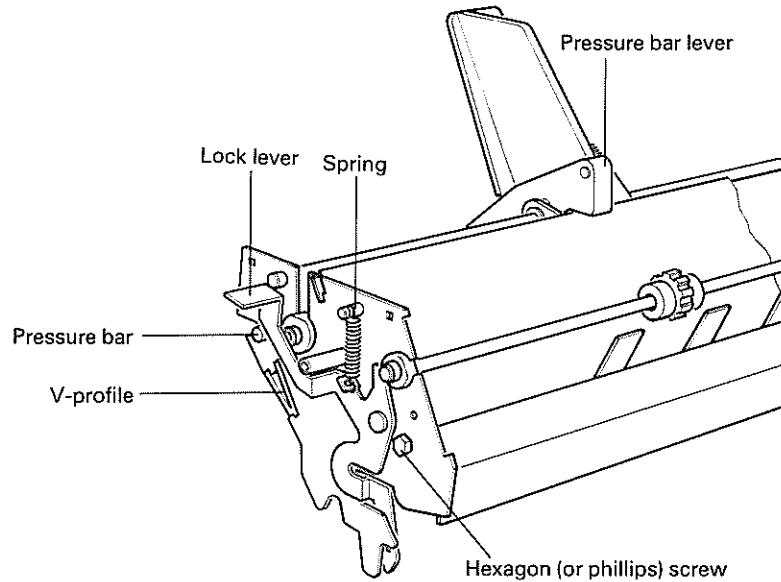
Drive Shaft and Rubber Rolls Removal (A)
